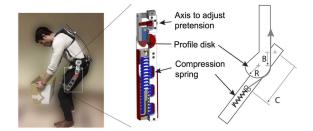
Picture of the spring-based, passive actuator on the SPEXOR prototype [23].
